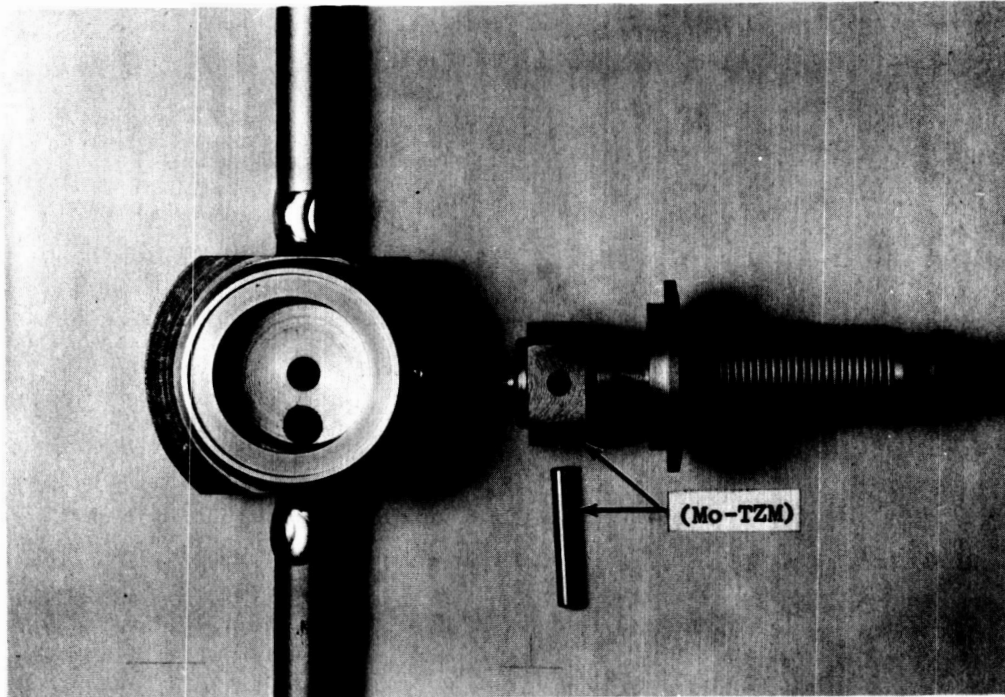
Component Parts of Hoke Bellows Valve Prior to the Final Welding Operation.
